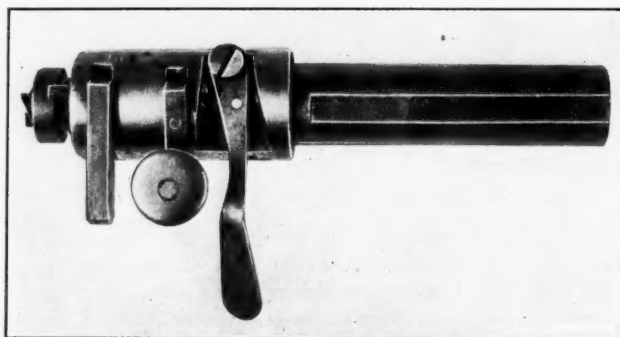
An Old Hollow Mill and Threading Die with Holder
